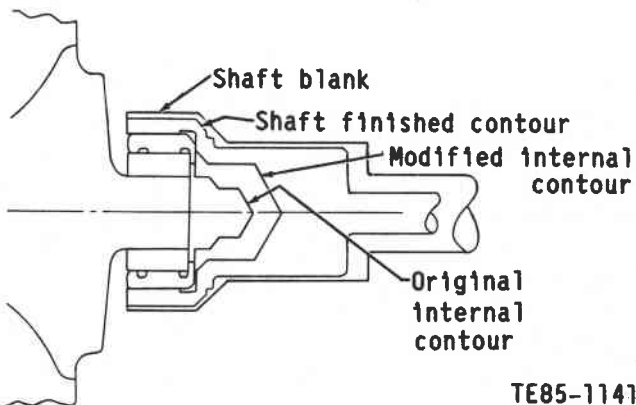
Modified shaft blank contour, second rotor/shaft attachment trial.
